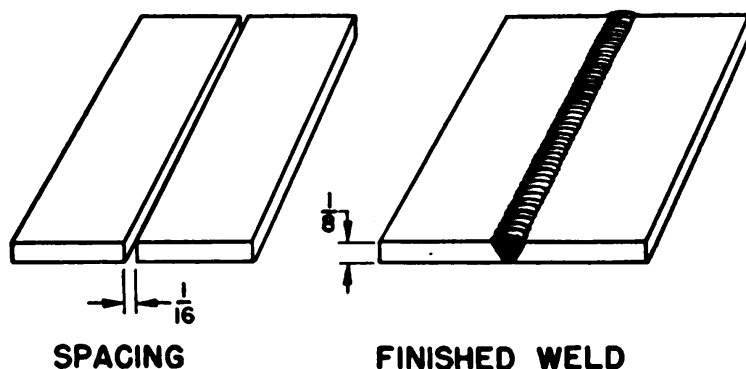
Butt weld in $\frac{1}{8}$ " steel.
